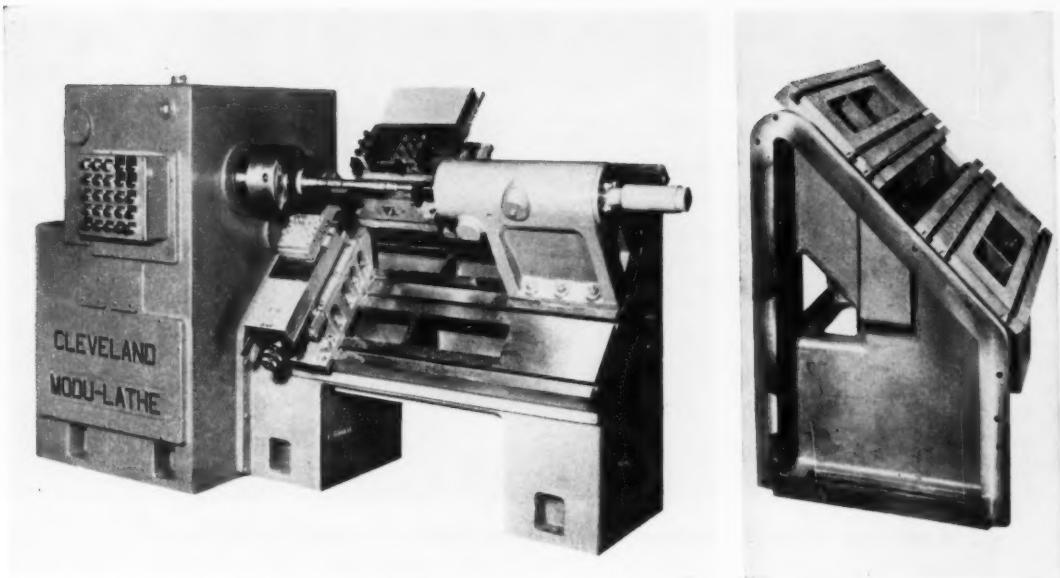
(Left) Modu-Lathe of line of machines using "building-block" construction brought out by Cleveland Hobbing & Machine Co. Fig. 2. (Right) End view of Modu-Lathe bed showing webbing, chip chutes, and massive construction
